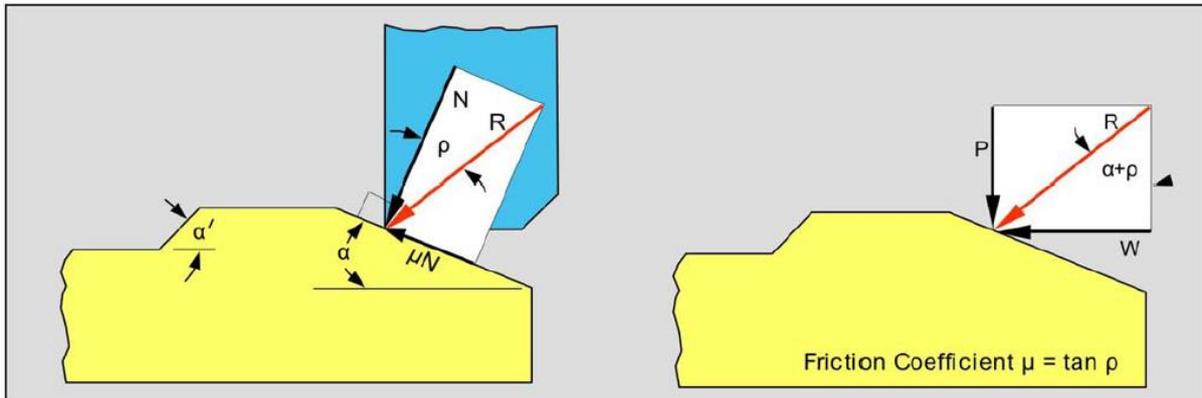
Defining the engineering force of assembly /disassembly (*Tutma/Çözme kuvvetinin mühendislik olarak tanımlanması*)
